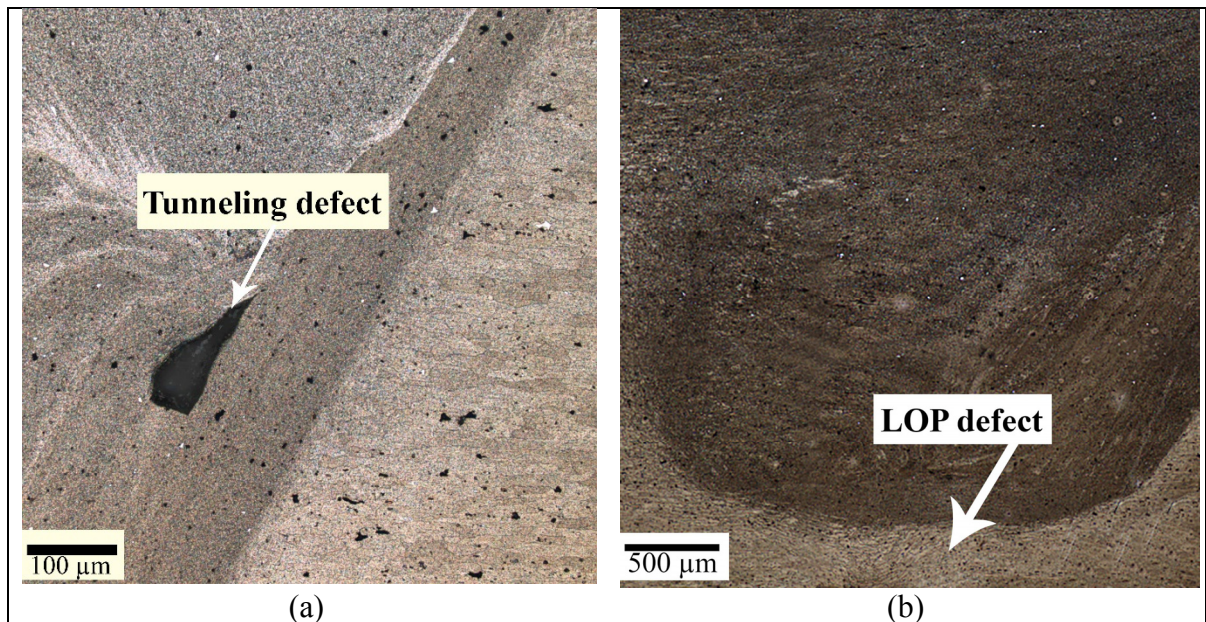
Defects produced by tool A in the bead on plate welds : a) tunneling defect b) LOP defect.
